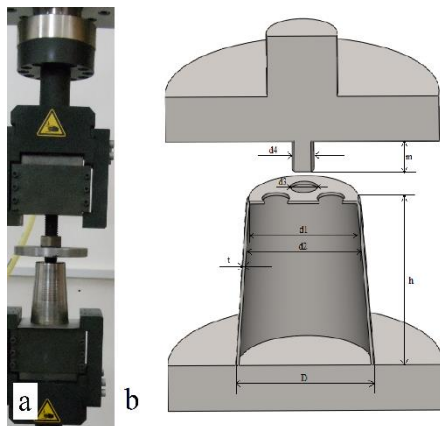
(a) Sample setup of one of the conical end capped tube, (b) Geometrical details of the specimen and the initiator
